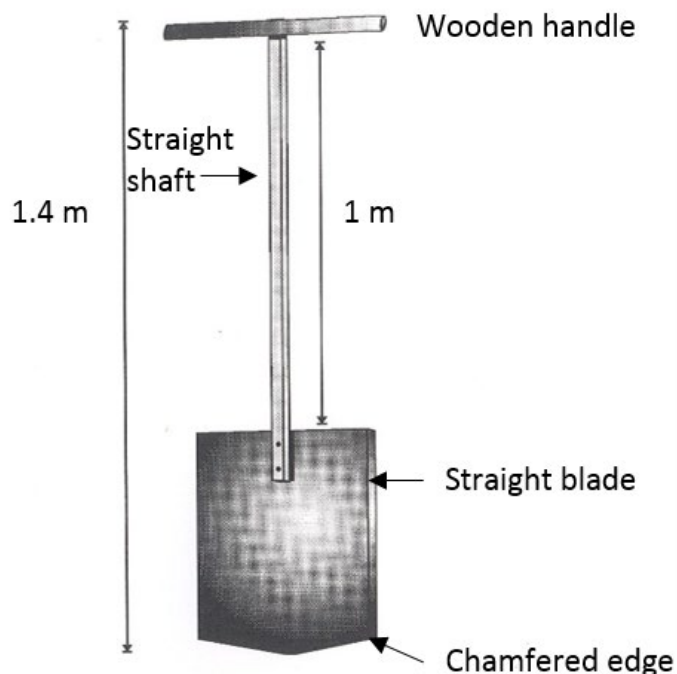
A basic design for a straight shafted peat spade, ideal for installing plywood or plastic dams.
